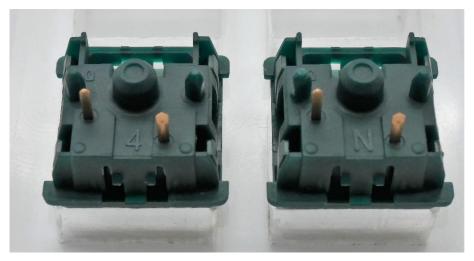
Pair of Gecko bottom housings demonstrating large number and letter mold markings as well as the consistency of the 'Q' marking as stated above.
